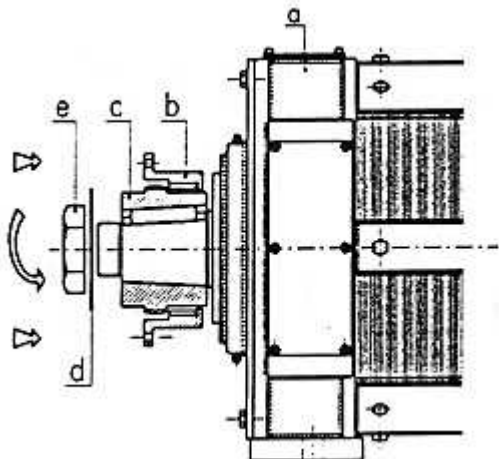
Keying the half-coupling (or pulley) on the shaft end
